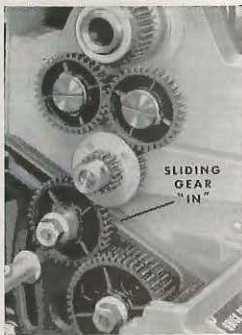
Sliding Gear in IN Position—meshes with the 32 tooth compound gear.
